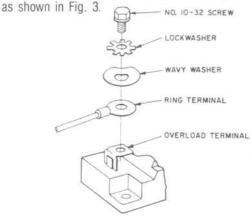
Torque Terminal Screws to 20 In. Lbs Maximum
